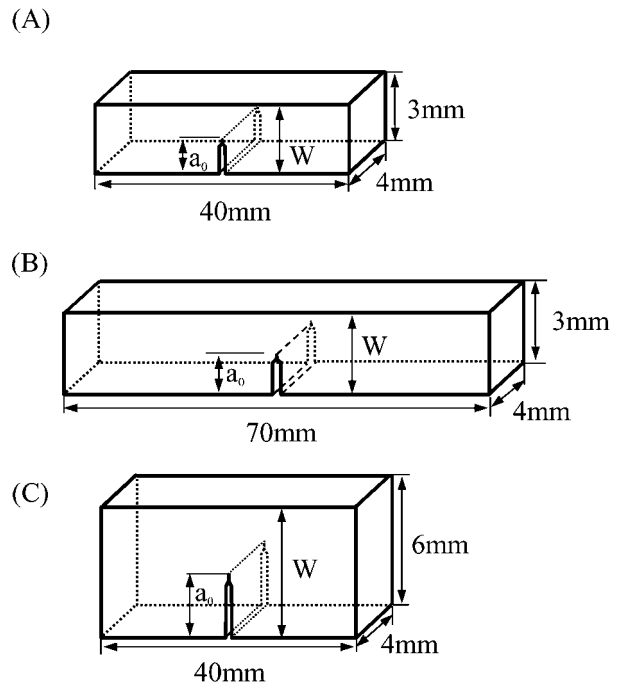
Three types of specimen dimensions for work-of-fracture tests.
